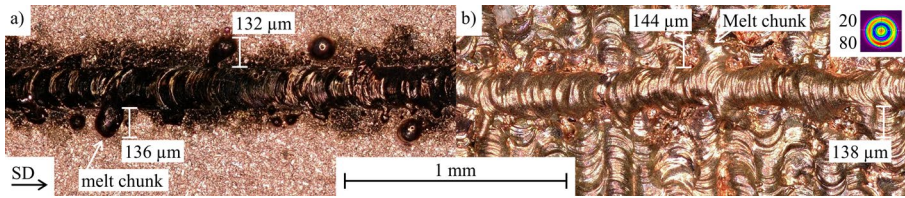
Top view of weld tracks welded a) on a substrate plate with an applied powder layer of 90 μm and b) on the top surface of a cubic sample manufactured with a layer thickness of 45 μm using a ring-shaped beam profile at a power ratio of 20/80 with a laser power P of 1000 W and a scan speed v of 500 mm/s [30]. The experimental procedure of the single-track experiments is described in the publication [30]
